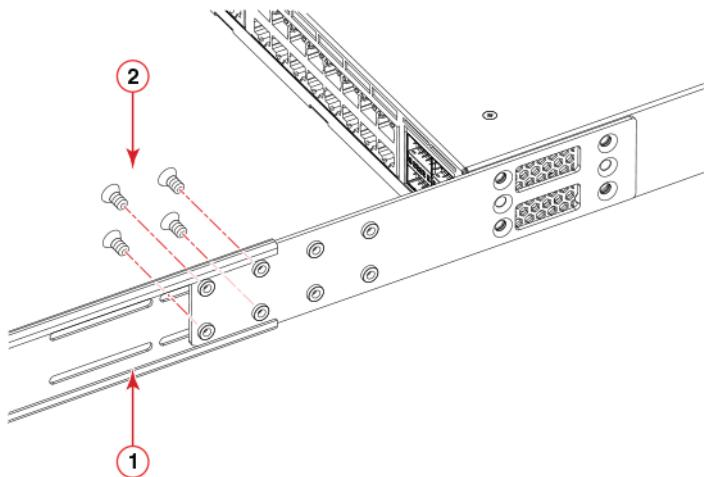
Attaching the rear brackets to the extensions at the front of the device
